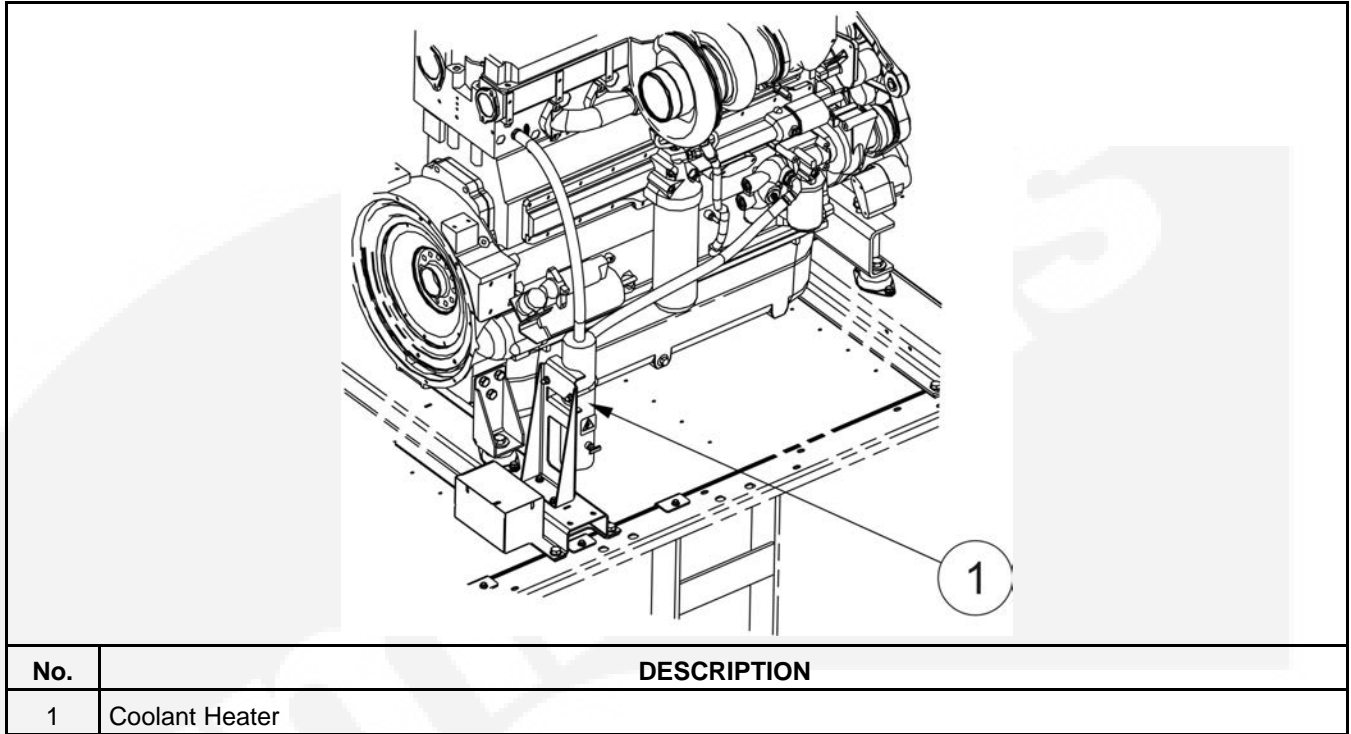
TYPICAL COOLANT HEATER MOUNTED ON THE GENERATOR SET
